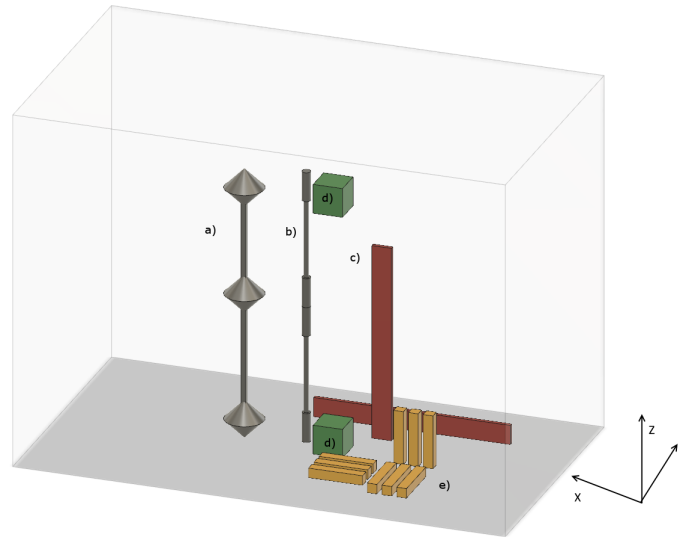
Printed test specimens, and rectangular test block configuration: a) feedstock recycling specimen; b) tensile test; c) bend specimen; d) density, micro, macro and hardness specimens; e) Charpy V-notch specimen
